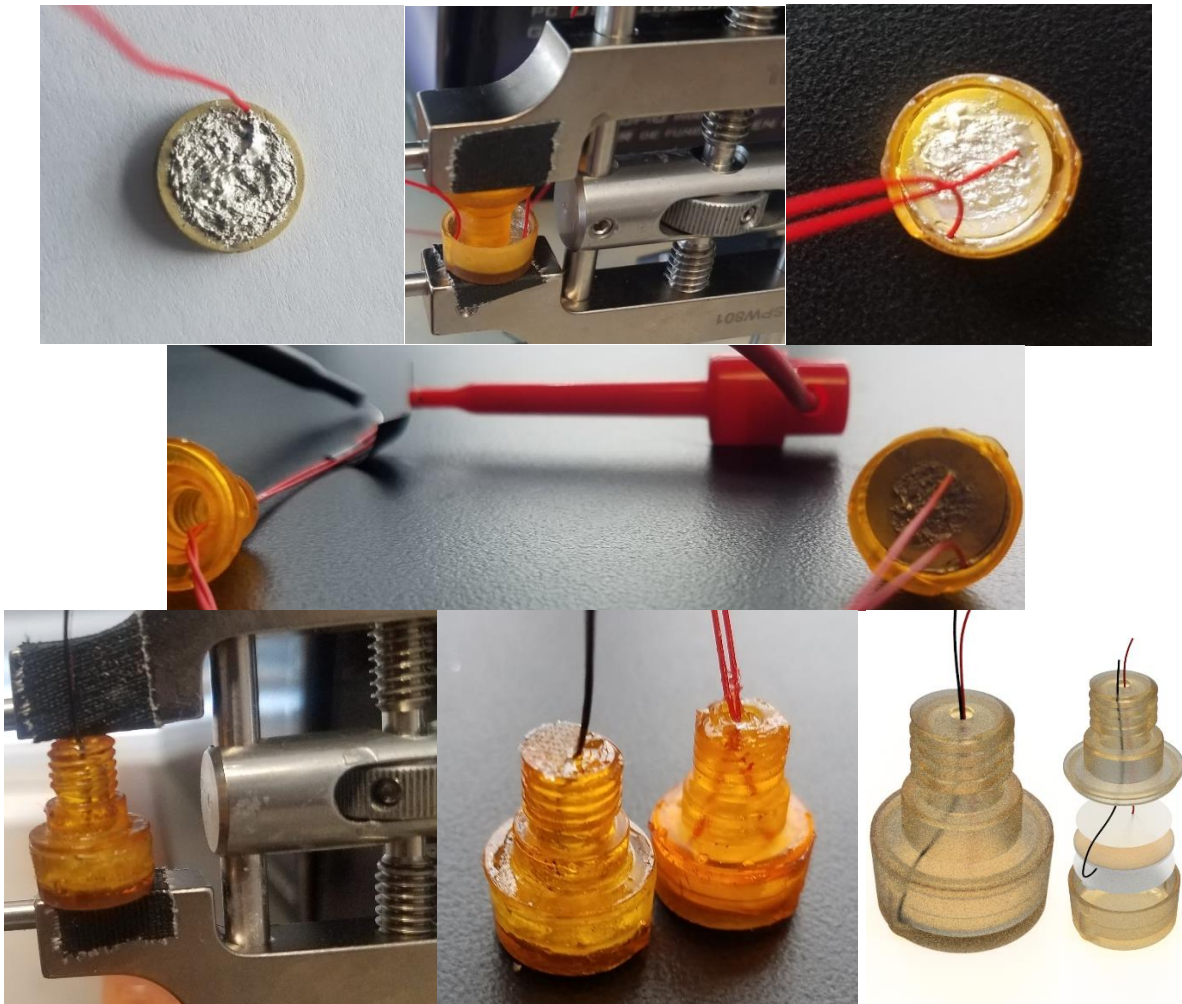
Transducer Assembly process from (top) painting and compressing of silver epoxy electrode to (Bottom) Sealing of casing and backing material. (bottom-right) Render of assembly subcomponents.
